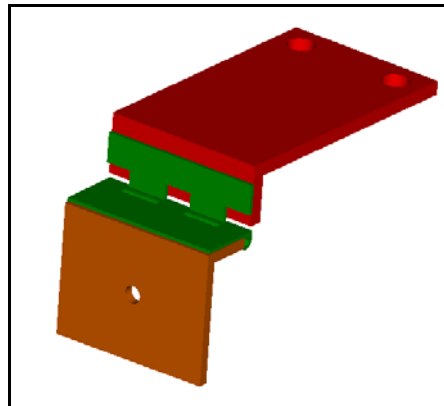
Piston Arm to Roof Connection: Wheel
